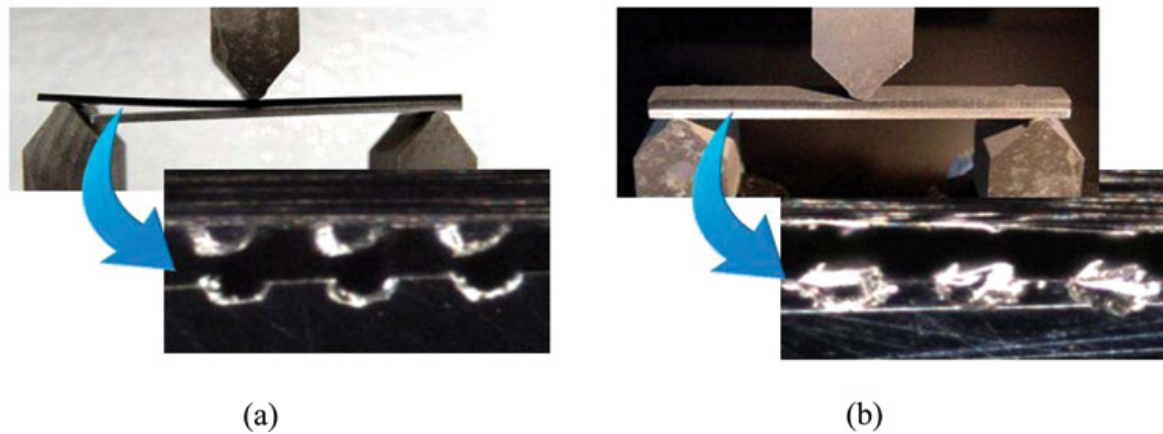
Cross section of the fracture surface for (a) the single leg bending joint, and (b) end notched flexure joint. [12]
